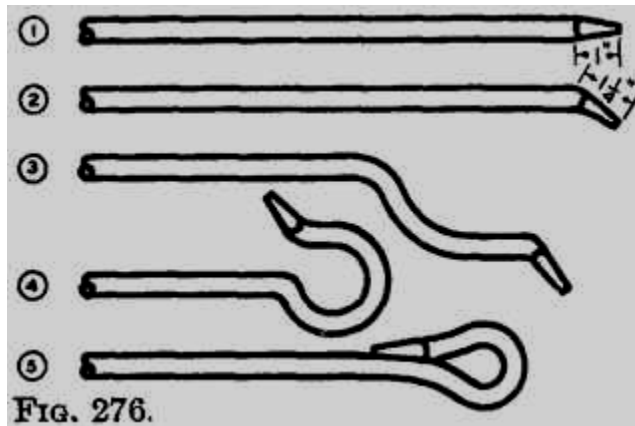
Steps in scarfing and preparing to weld an eye on the end of a rod.
